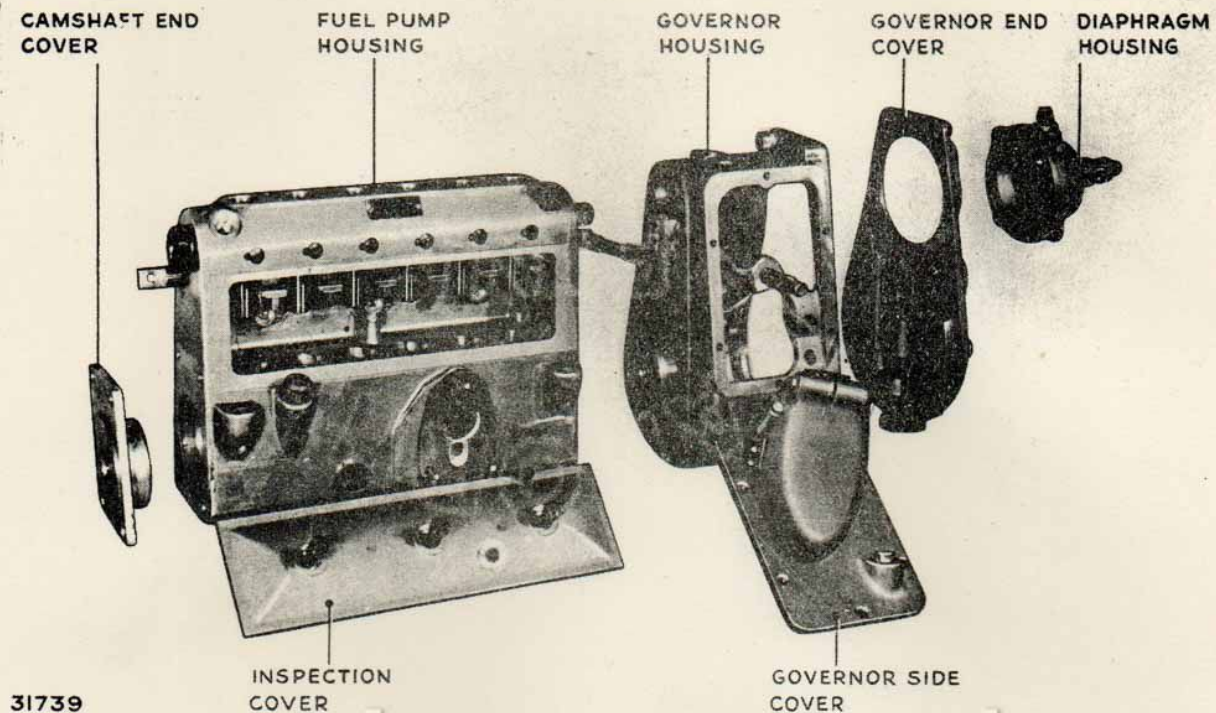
INJECTION PUMP GOVERNOR HOUSING AND COVER.
